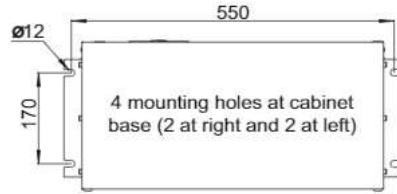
Positions and dimensions of the mounting holes at the base (in mm)
